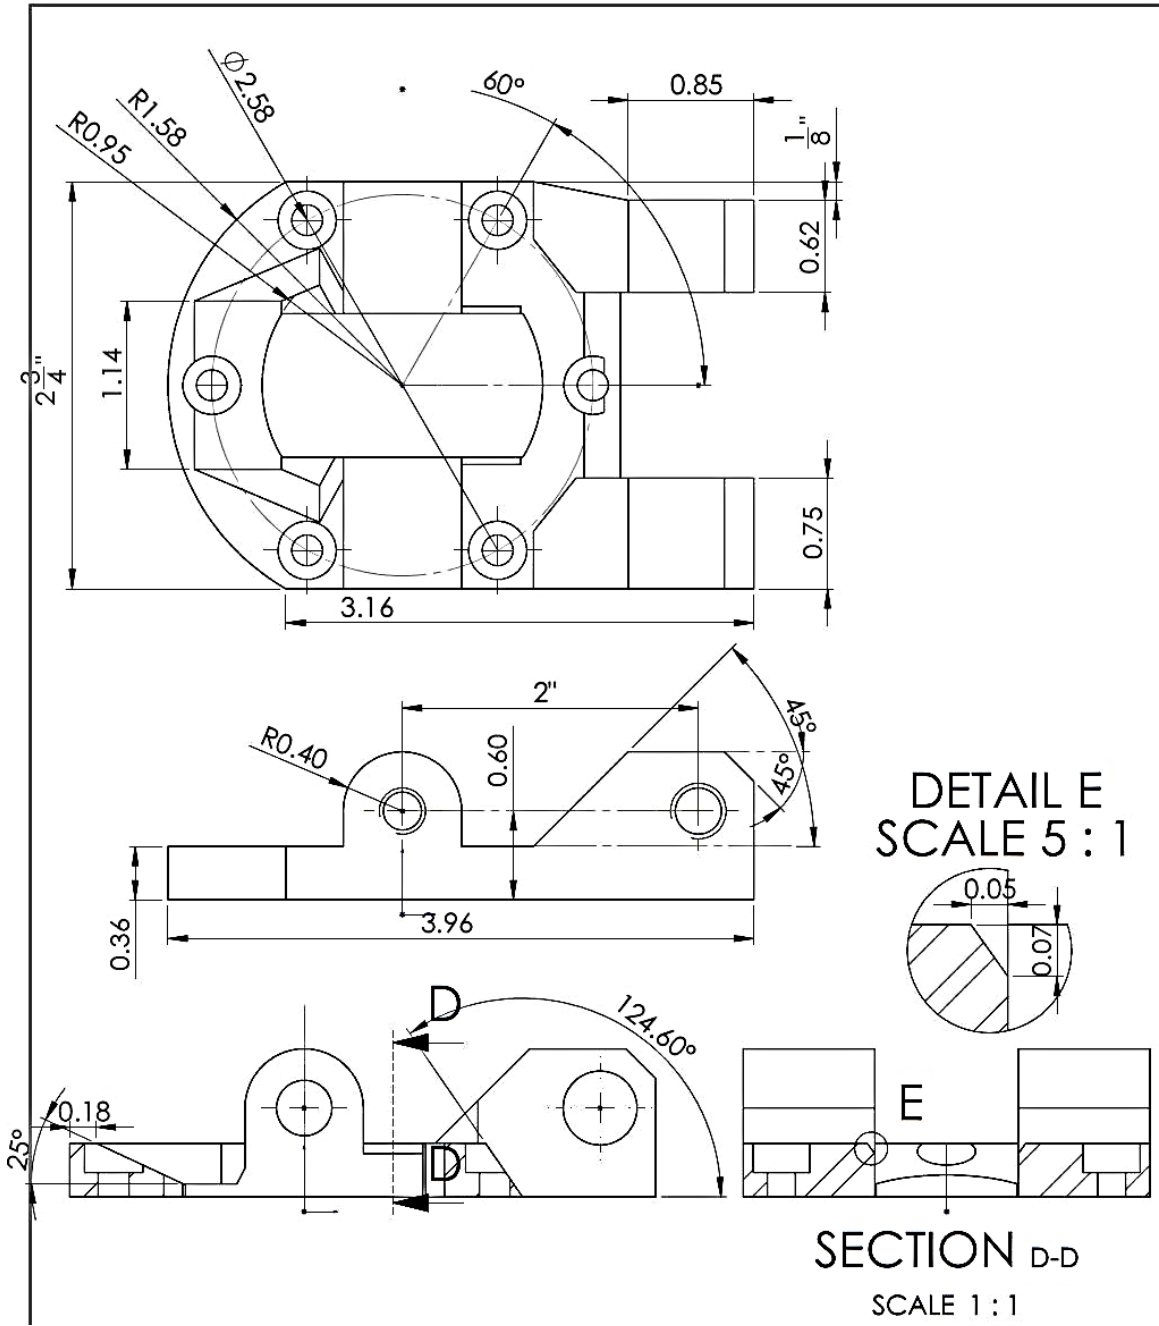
Technical drawing for machining the bottom ankle plate. (3 of 3)
